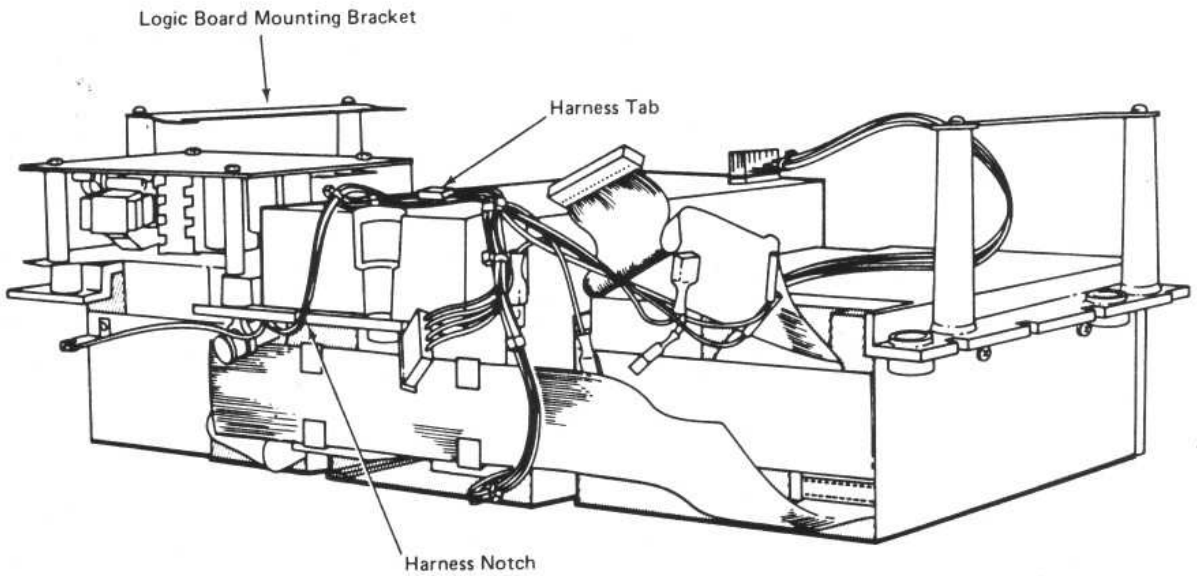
CHASSIS ASSEMBLY—REAR VIEW
